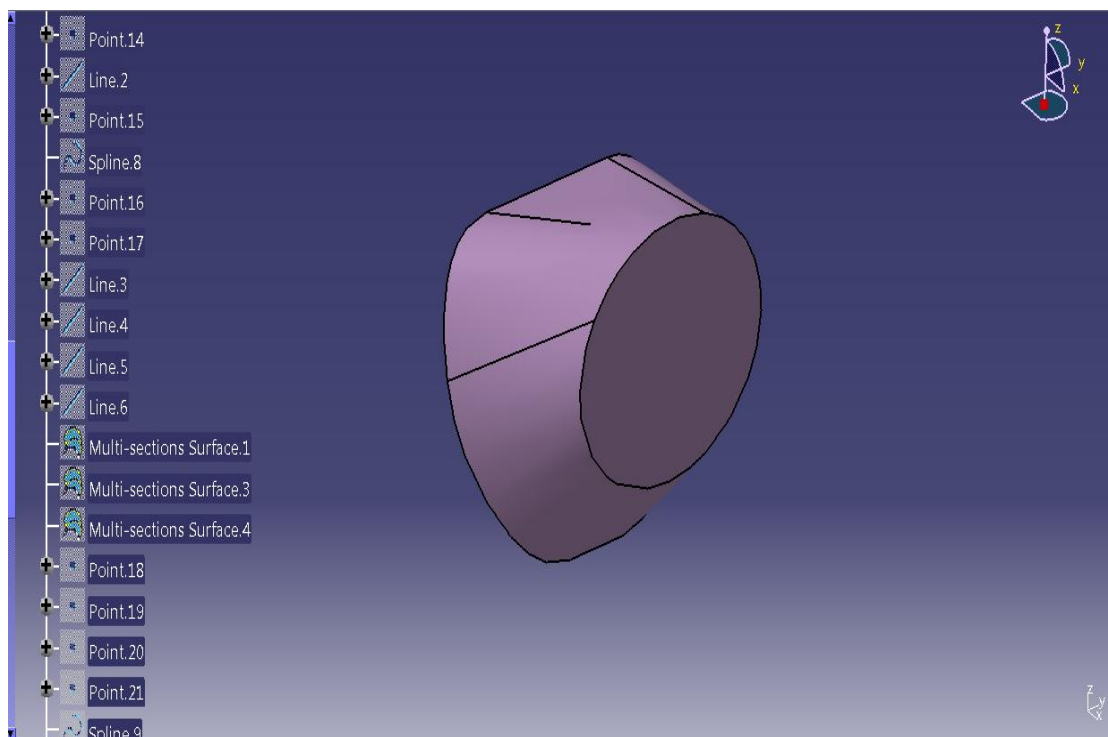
Handbrake's adjusting knob wireframe.
